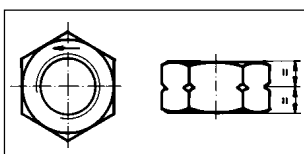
Left-hand thread shall be marked with a left turning arrow on one bearing surface or a groove halfway up the nut height (fig. 3)
